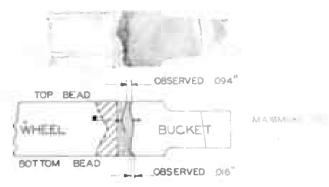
First Bucket Removed from Wheel-and-Bucket Design Test Specimen No. U-13 by Nick and Fracture Technique. Note that Maximum Notch Extension Has Occurred Near Center of Section Rather than at the Surface.
